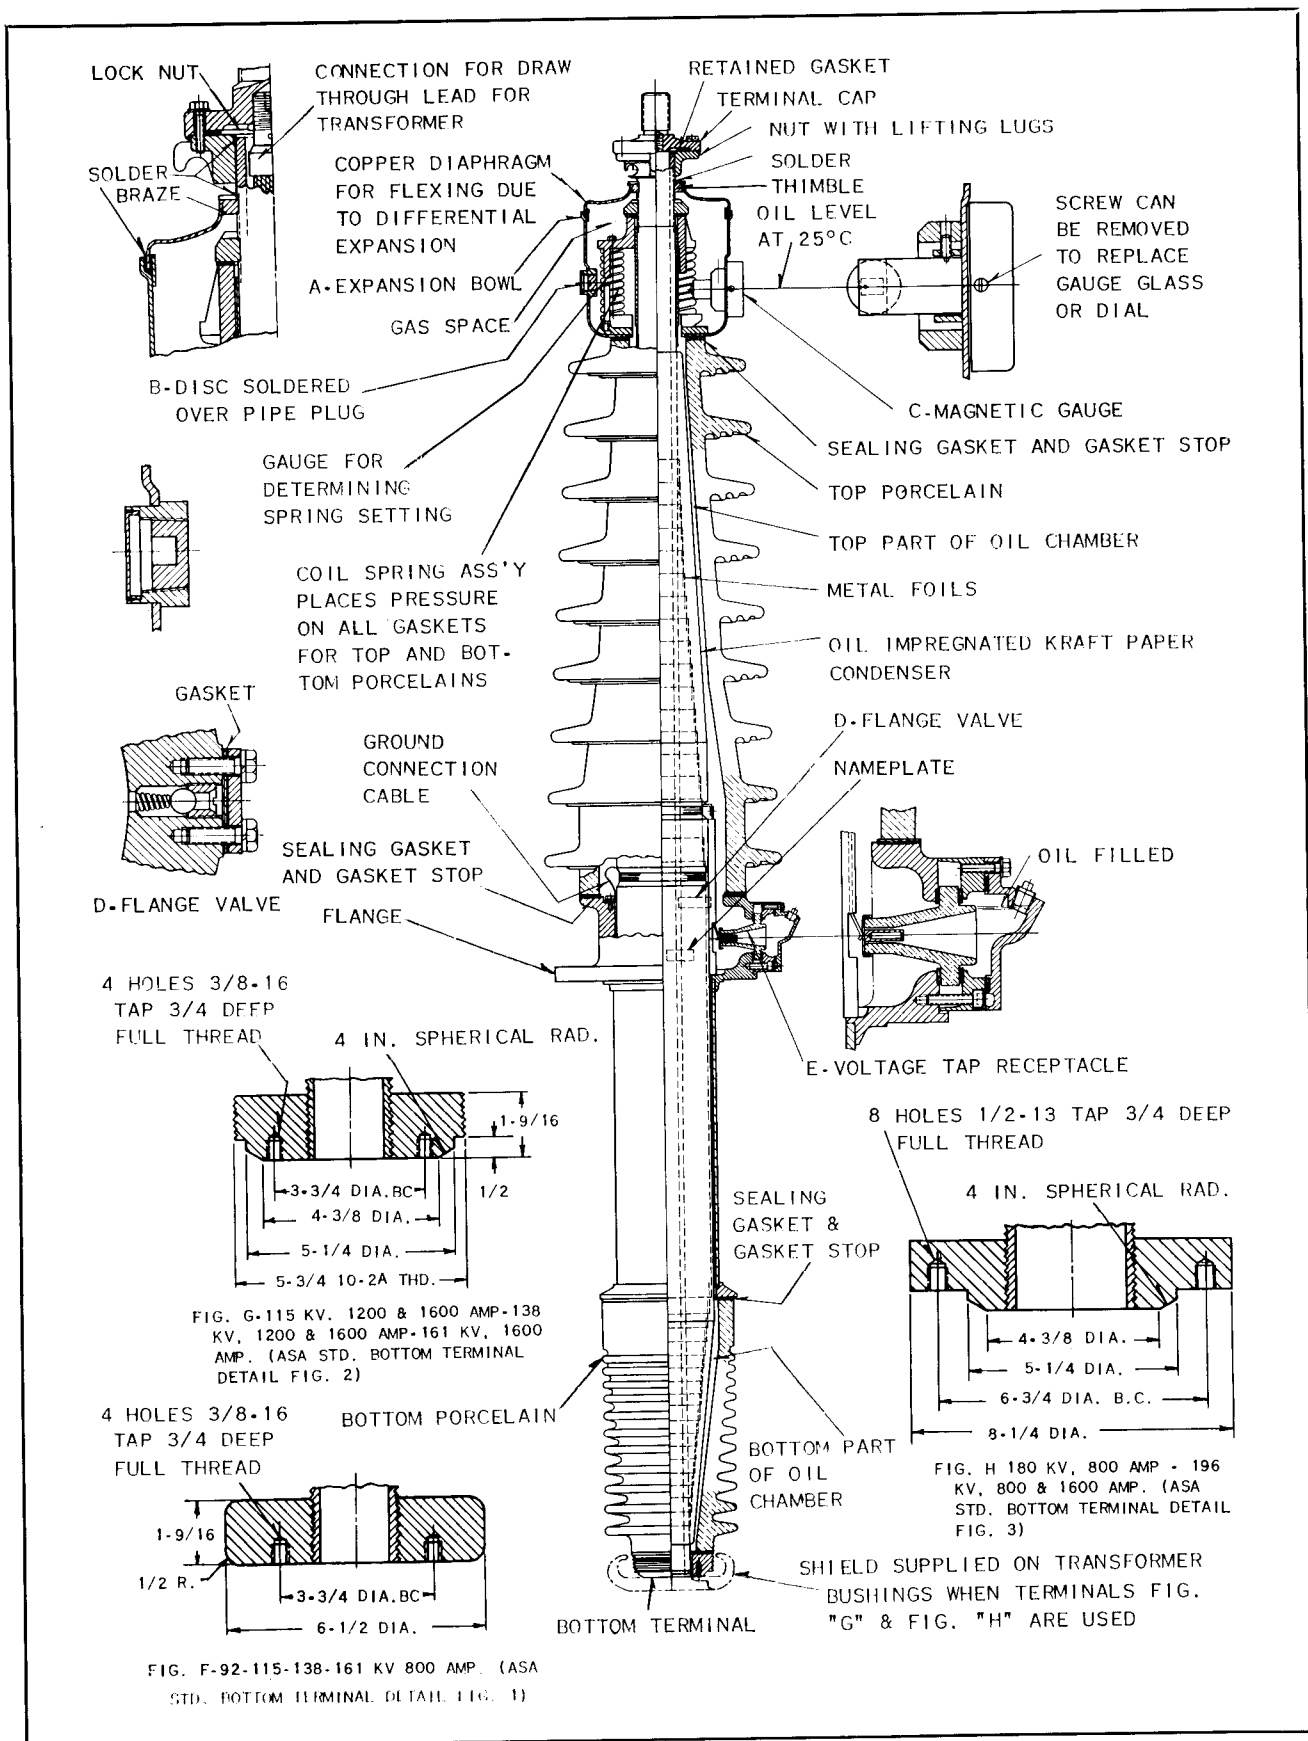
Sectional View—Condenser Bushing, Type "O"
